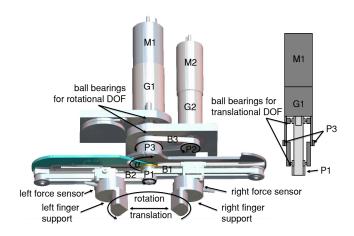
Left: CAD model of the ReHapticKnob: The geared motor M2-G2 rotates via a belt transmission B3 the ball bearing supported structure consisting of the geared motor M1-G1 and the two front arms on which the finger supports are placed. Right: Principle sketch: the translational DOF is actuated by motor M1 which is connected to gear G1 and rotates a pulley P1 which is connected through a shaft extension (bright grey) and gets supported by two internal ball bearings. Pulley P1 is connected with two other belt transmissions B1 and B2 which are fixed to the left and right finger supports, respectively. Pulley P1 transforms the rotation of motor M1 into a translation of the finger supports mounted on linear guides. 6DOF force transducers are placed directly under each finger support. It is possible to adjust the angle α between the two finger supports for different exercises by shifting the right (light blue) aluminum plate by $\pm 60^{\circ}$ starting from the horizontal initial position.
